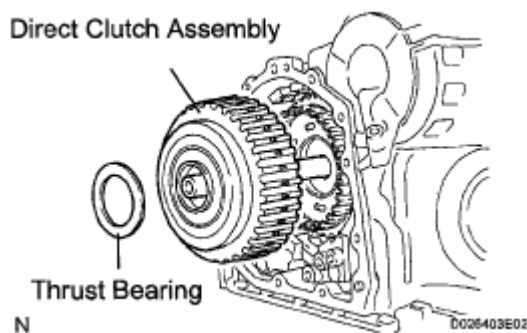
Identifying Thrust Bearing And Direct Clutch Assembly
